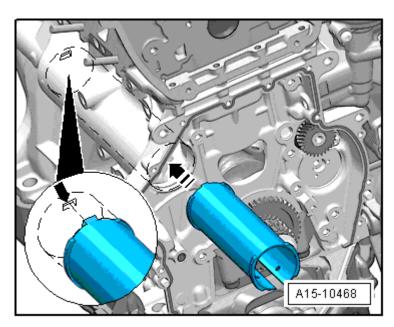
Identifying Pipe For Balance Shaft - Installation Position
